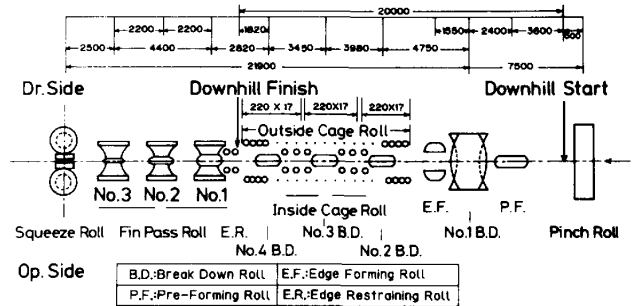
Layout of 26 inch cage forming ERW pipe mill
